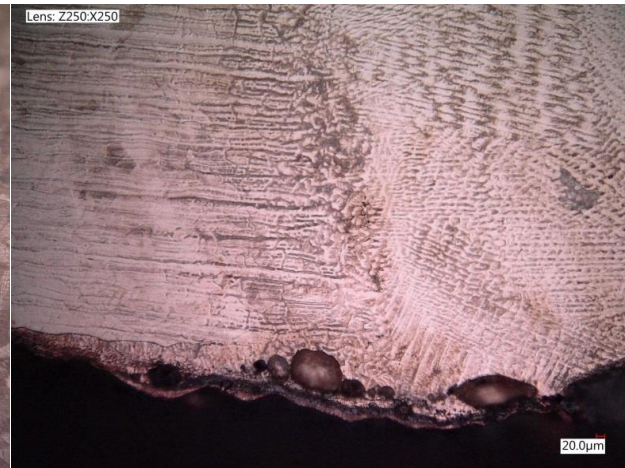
Sample welded without backing gas, top of weld (bottom in the image). Etched for 10s. Micro-segregation can be seen in the weld as well as the pores at the back side of the weld.
